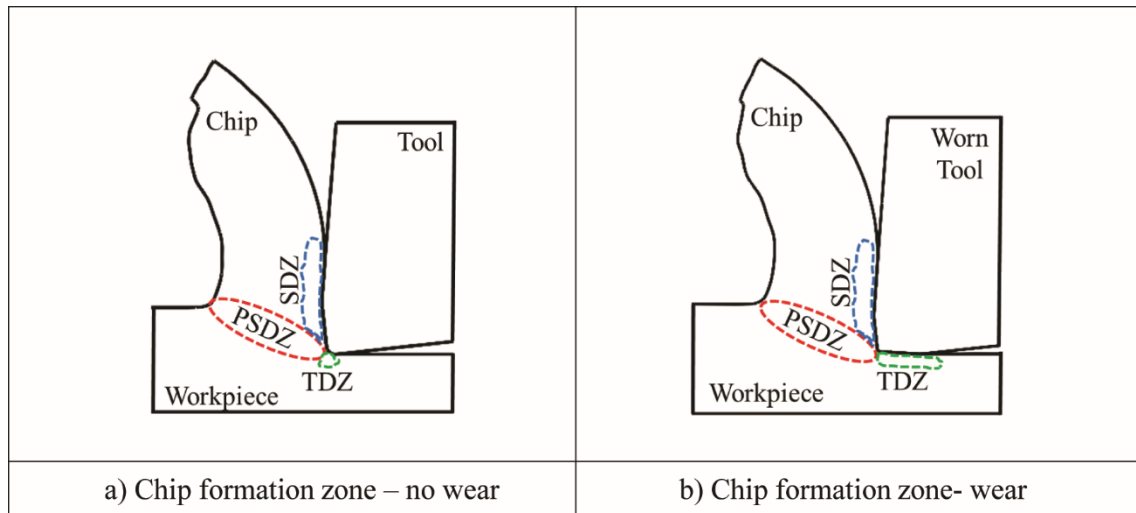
Chip formation when cutting with a) tool with no wear and b) tool with flank wear.
